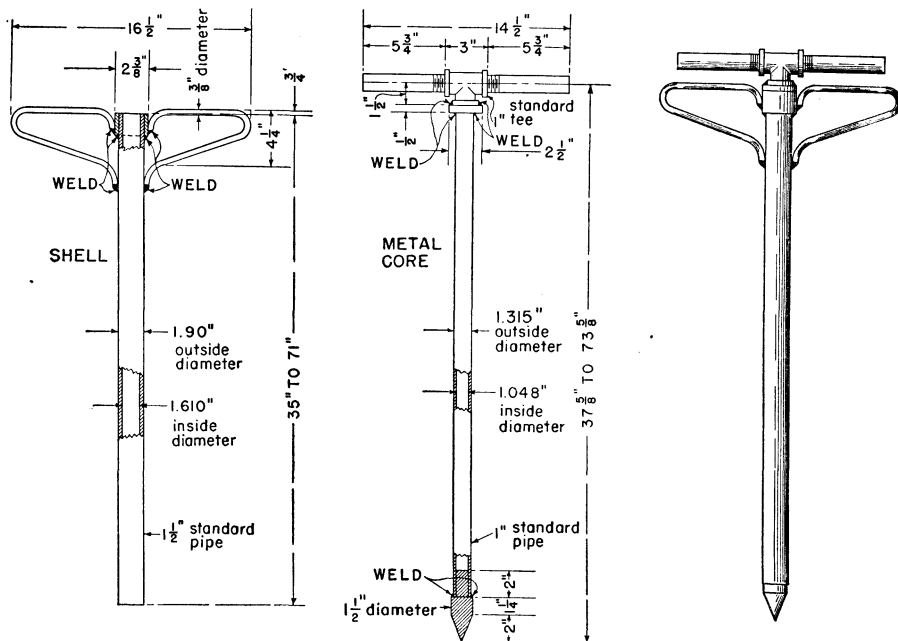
The Ashley core punch, a useful tool for getting dynamite into wet soils that tend to cave or for getting it under stumps and boulders.
